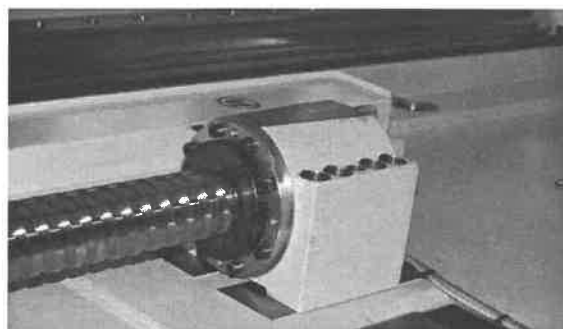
Axially unlockable thrust bearing of StarragHeckert ball screw drive
